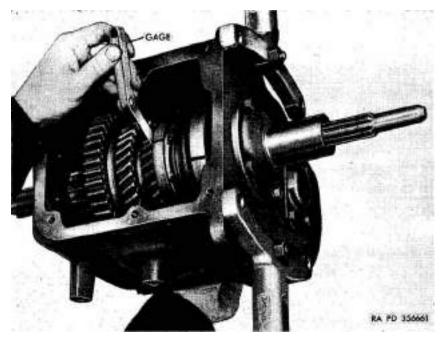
Checking end play of synchronizer assembly with thickness gage.
